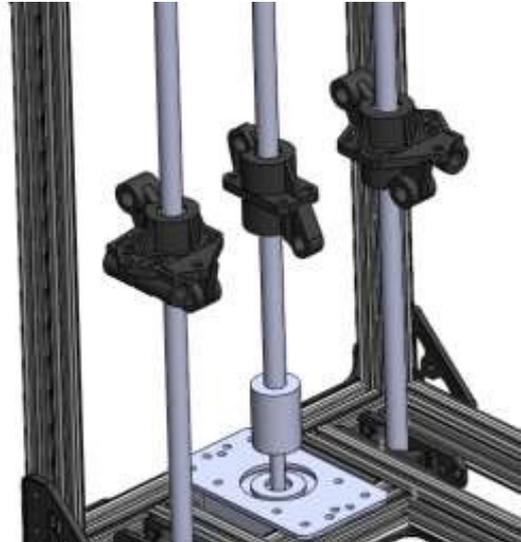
Lead nut mount and Bearing mount positioning. Source: [OpenLabTools](#)
